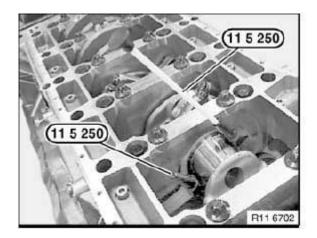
Identifying Special Tool 11 5 250 Courtesy of BMW OF NORTH AMERICA, INC.
